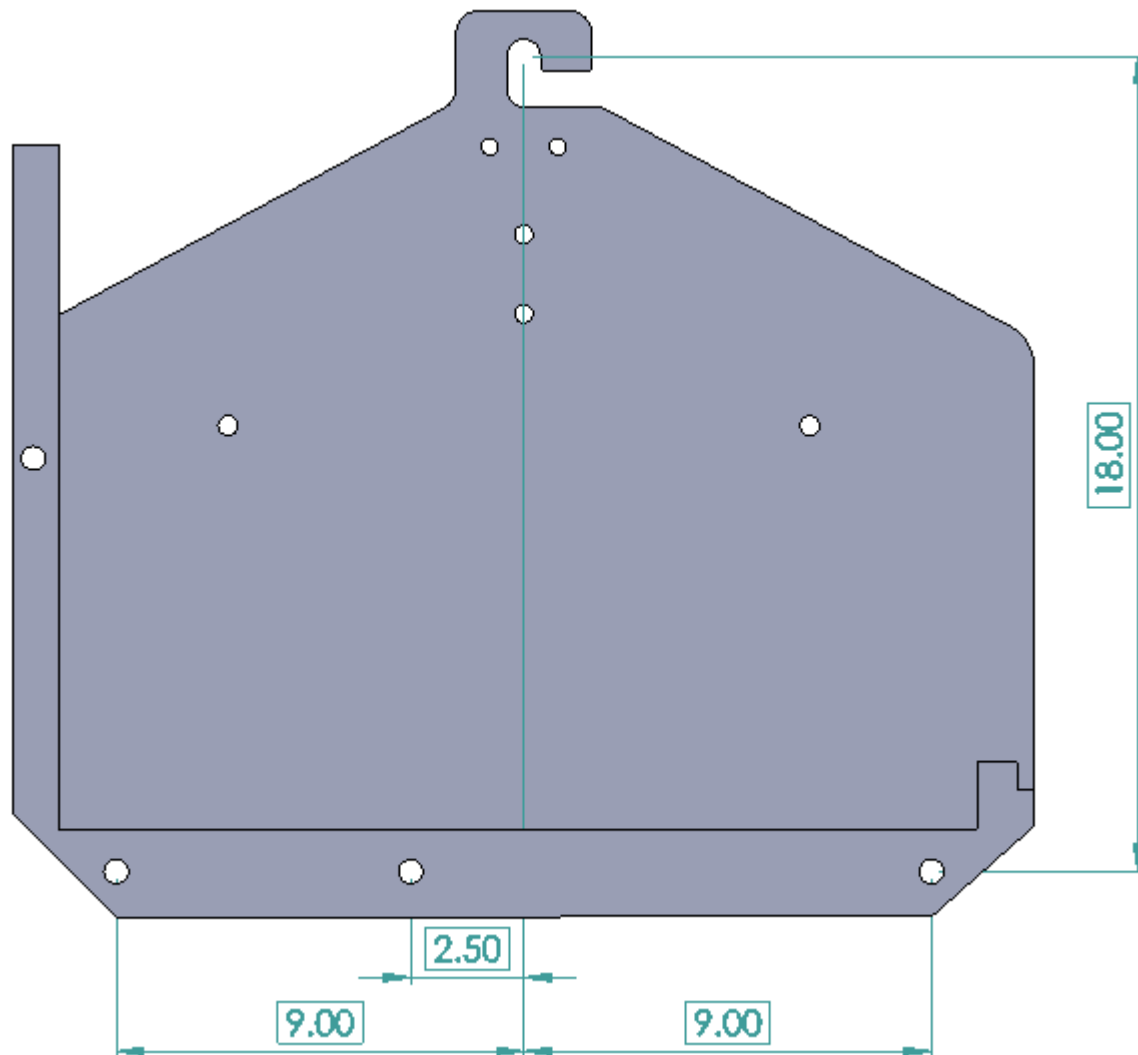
MODIFIED DIMENSIONS OF SHELF END-WALL PIECES.
